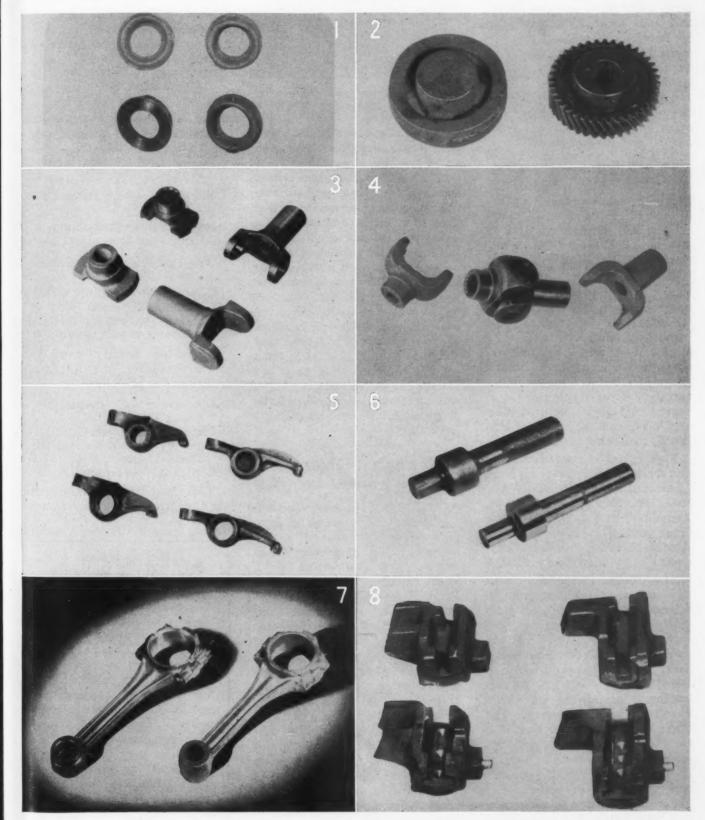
1-Automotive clutch throw-out collar. 2—Washing machine gear. 3—Rear propeller shaft flange (left) and front universal joint yoke (right). 4—Universal joint yokes. 5—Automobile valve rocker arms. 6—Refrigerator crankshaft. 7—Automobile and refrigerator connecting rods. 8—Automotive transmission shifter forks.
